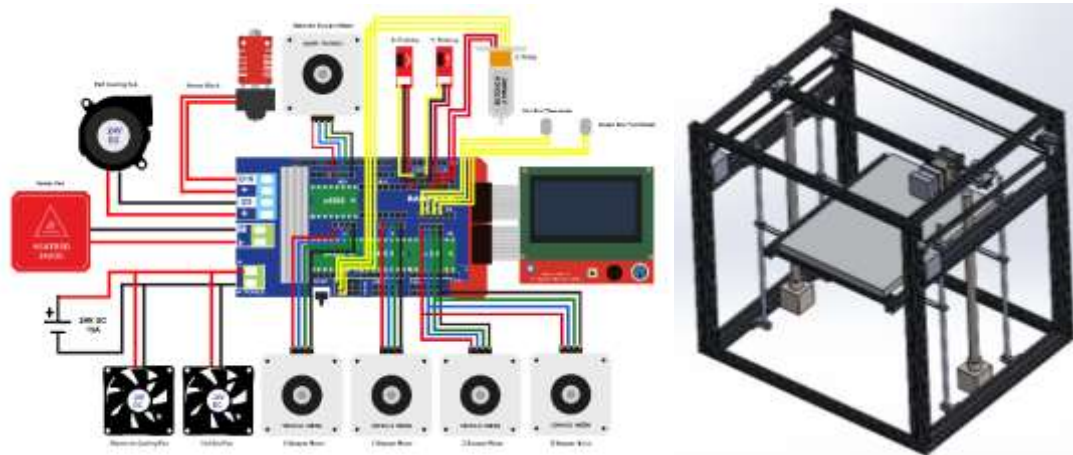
Electronic Design and Mechanical FDM 3D Printer
